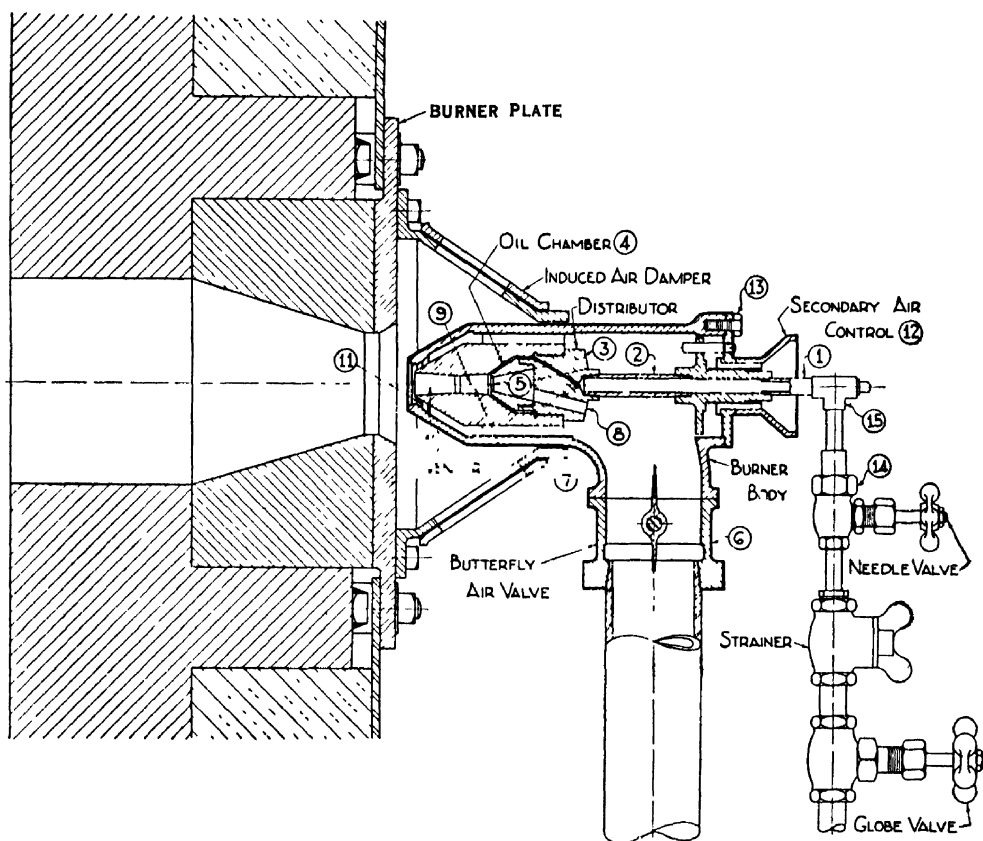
VII.—Cross-sectional view of an oil burner. (Courtesy of The Philadelphia Drying Machinery Company.)
